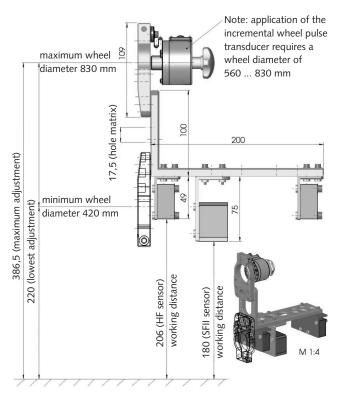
DCA system dimensions, sensors (including optional SFII-P sensor) and mounting unit
